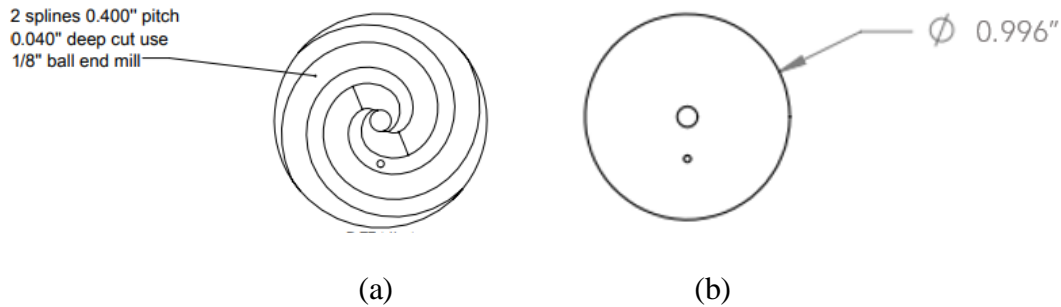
Die geometry of (a) scroll die (b) flat die
